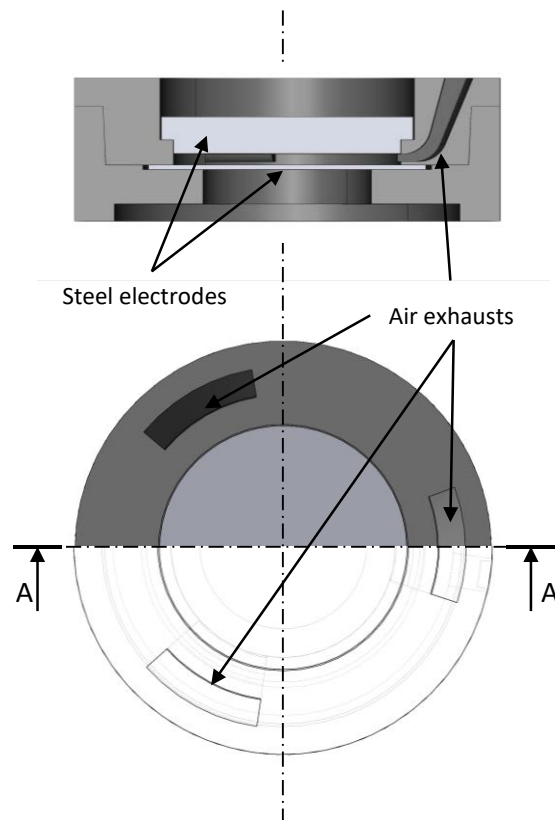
Mold schematic assembly: upper and section view of the assembled mold.
